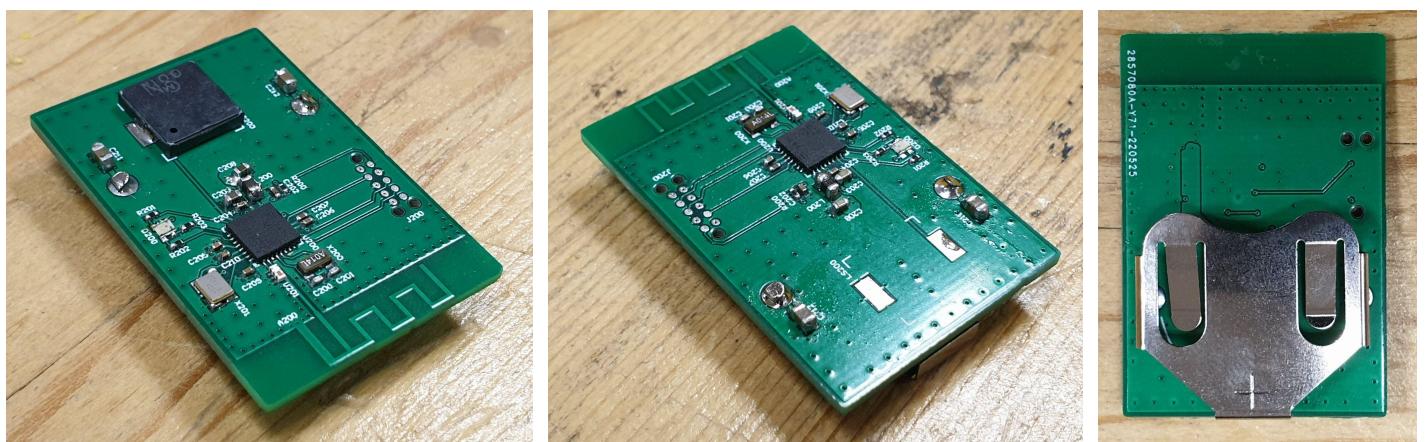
PCBs used for the project with and without buzzer with their backside
